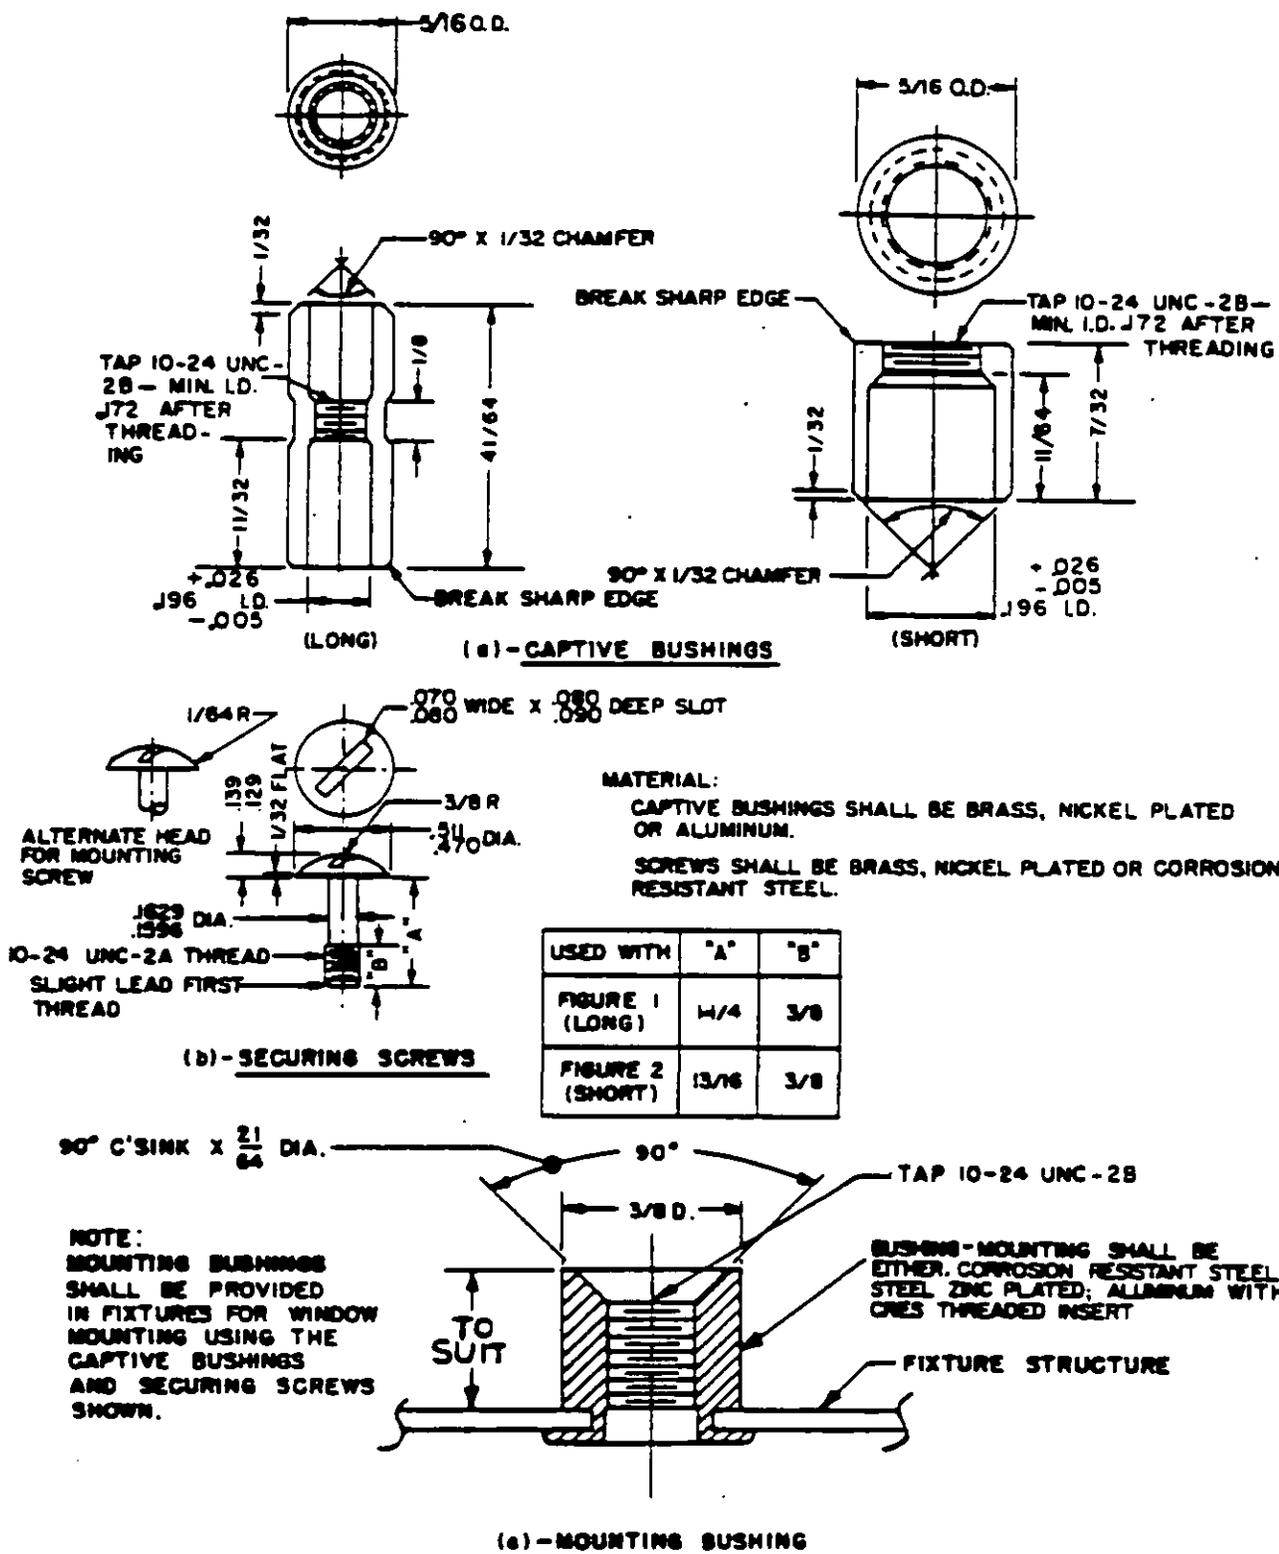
Captive bushings, securing screws and mounting bushings.
